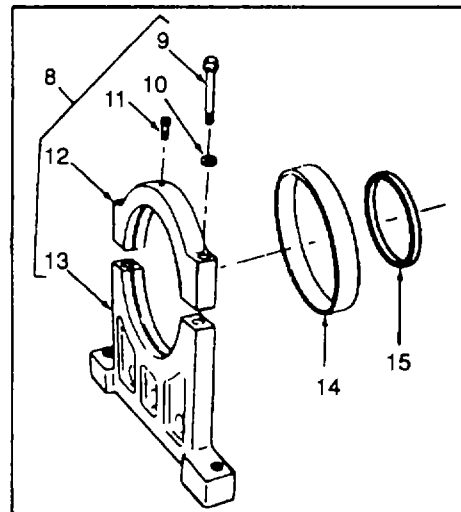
Engine Assembly and Related Parts (Sheet 1 of 2)
